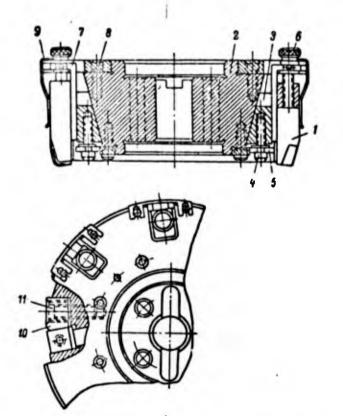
ENIMS End Milling Cutter With Adjustable Inserted Teeth
